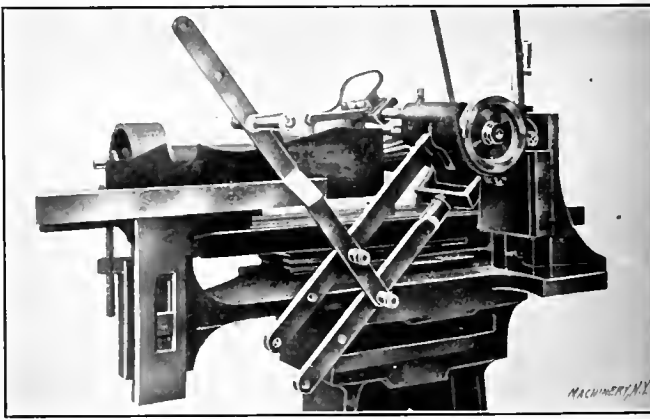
Front View of Machine for Milling Teeth of Formed Cutters.
